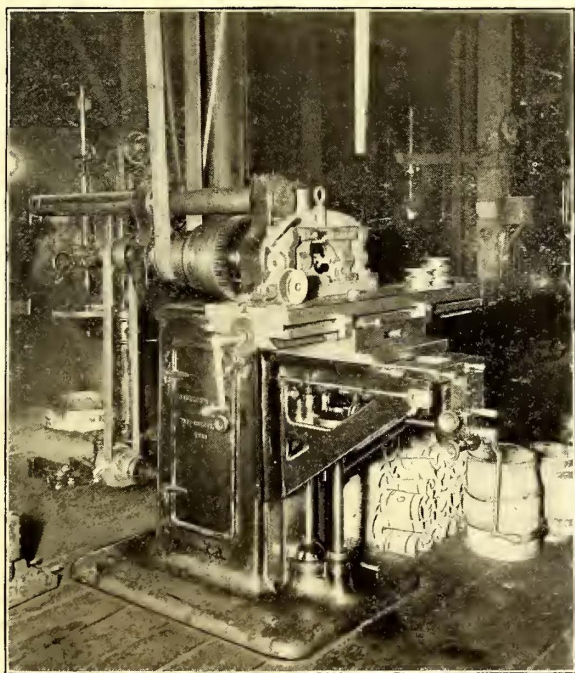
TOOL FOR CUTTING GROOVES IN TROLLEY WHEELS
